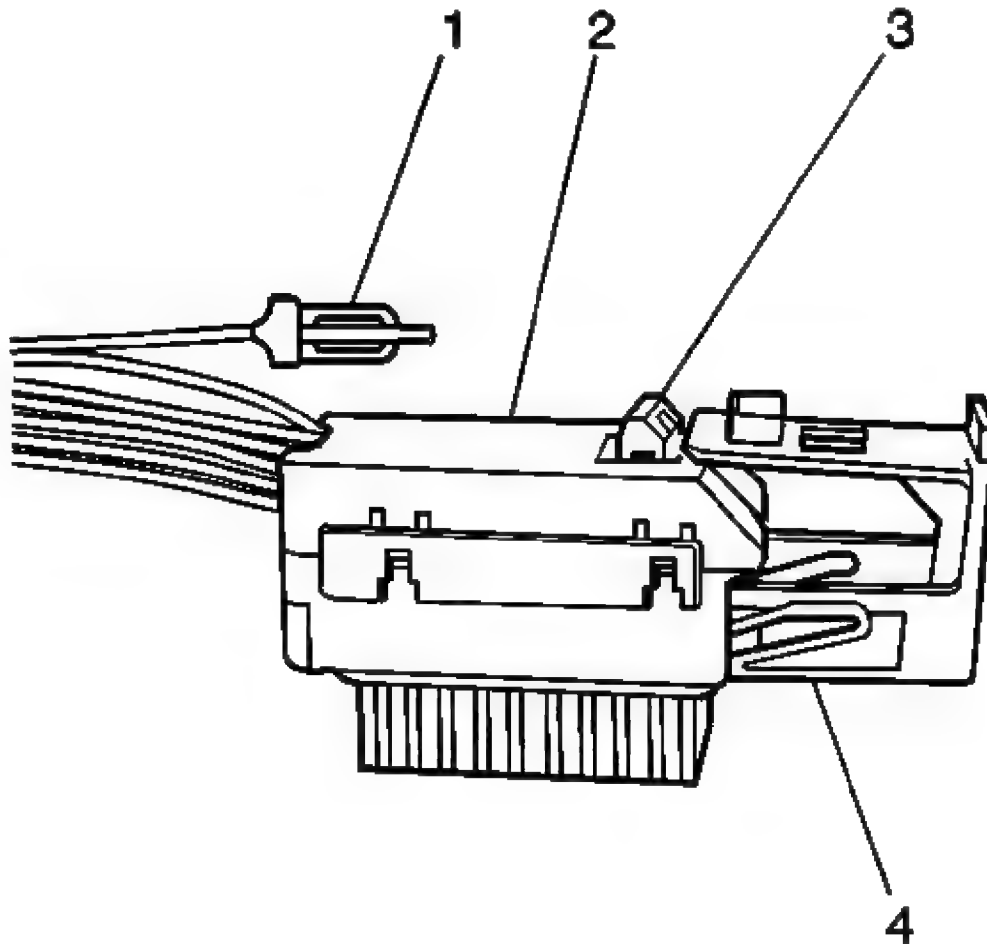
View Of Connector Position Assurance (CPA) Flex Lock Button
